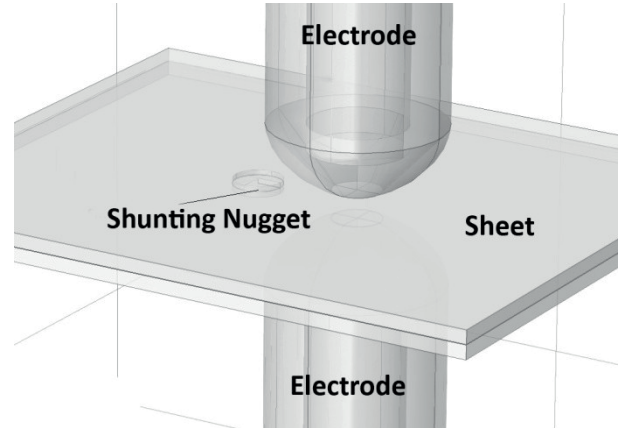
Welding configuration, showing shunting nugget and other parts in FEM model
